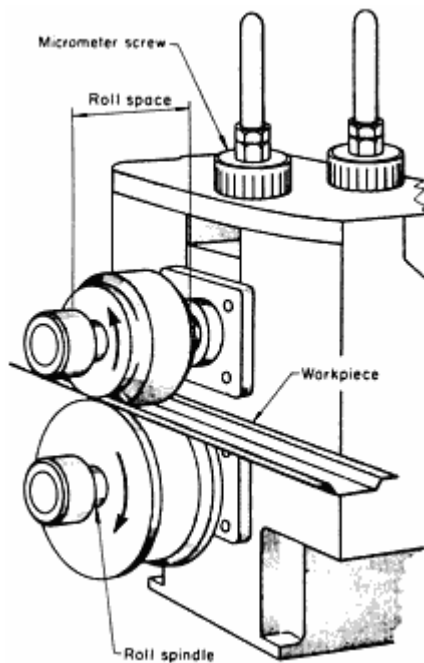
Overhung-spindle machine (one roll station) for contour roll forming
